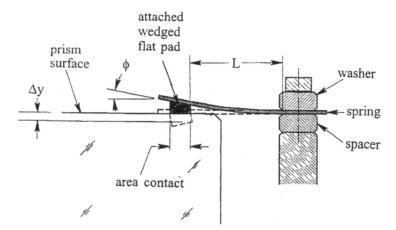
Configuration of a cantilevered spring-to-prism interface with a flat pad pressing against a flat surface of the prism.
